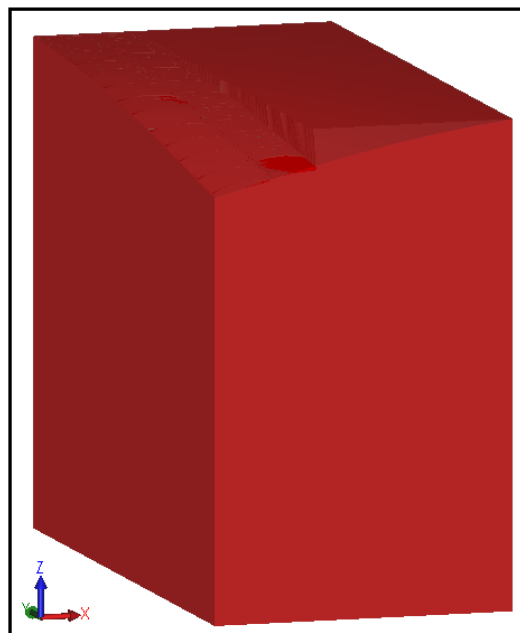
Output of part 1 using 5-axis machining simulation.
